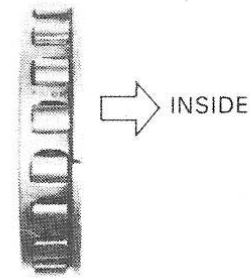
B.30 The one-way clutch must be installed with the flange side in (Sec 15)
